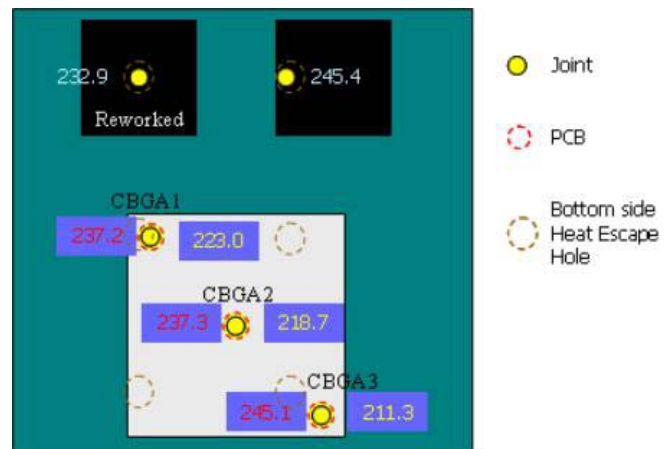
Thermocouple placements on the CBGA and uBGAs.
